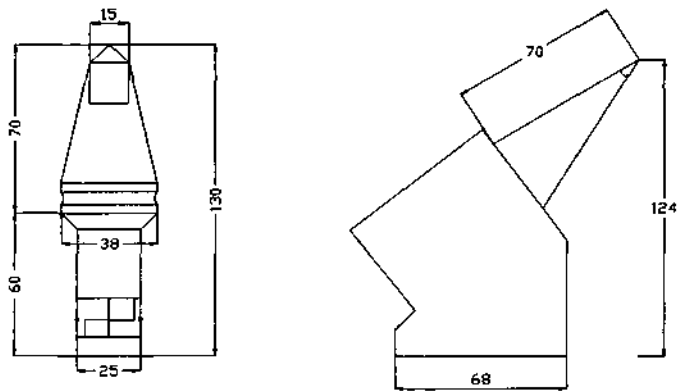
Betek B40 HDS Pecs type pick and pick box.
